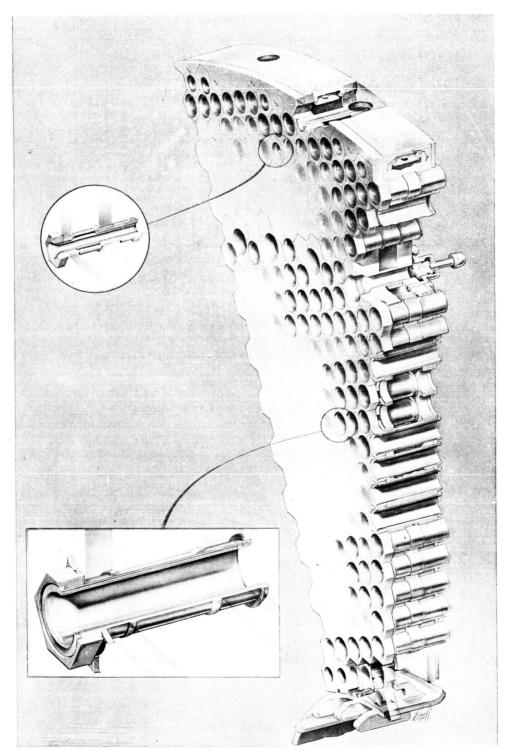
Sector of 140E aft-retainer assembly (Neg. DI-533)
